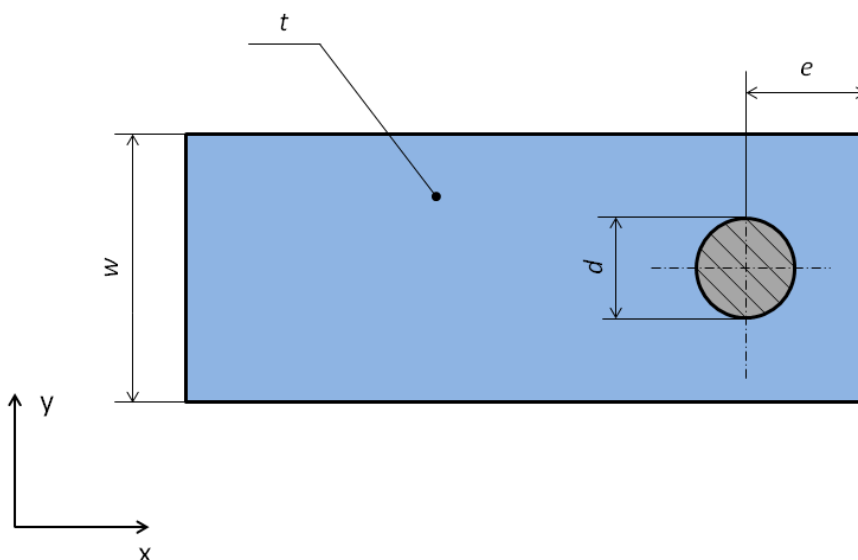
Important dimensions of bolted joint. d - Bolt diameter, e - End or edge distance, t - Thickness, w - Width or bolt distance
